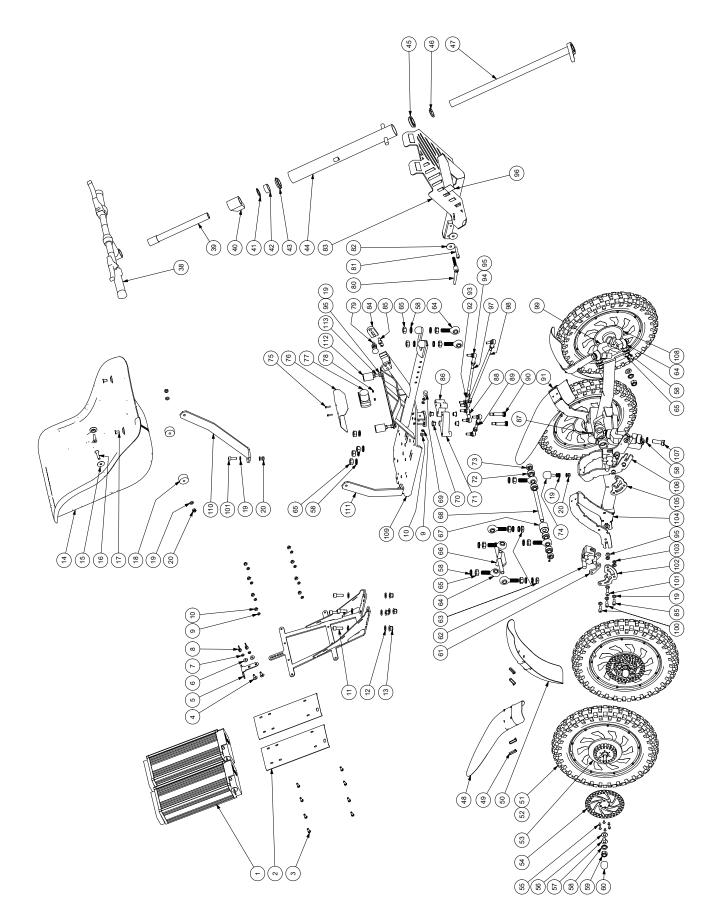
Exploded view of ZOOM without swivel seat.
